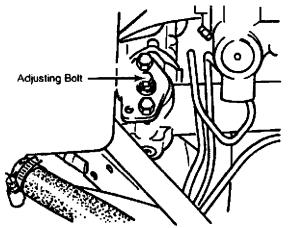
Adjusting 100 & 200 Steering Gear Courtesy of Audi of America, Inc.
